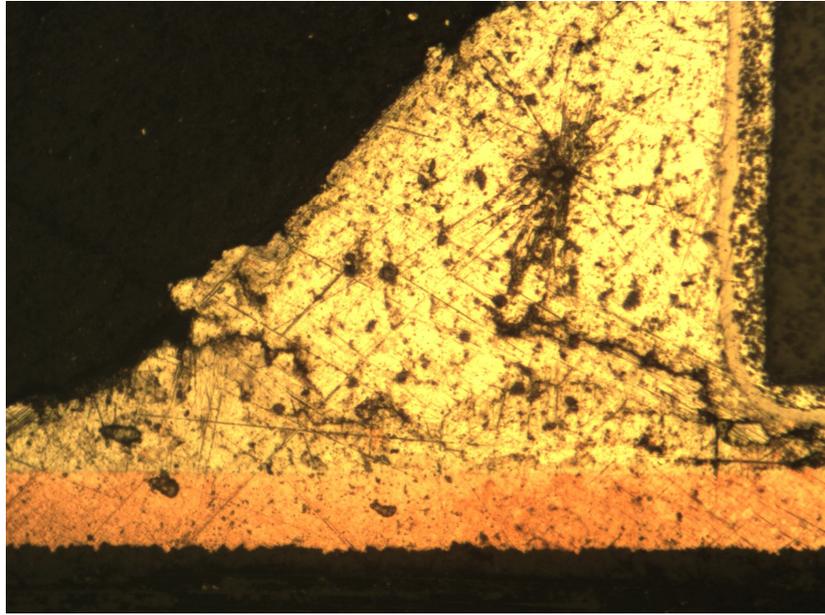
Hot Melt 2 on FR4 Test Board 2512 Resistor Image
